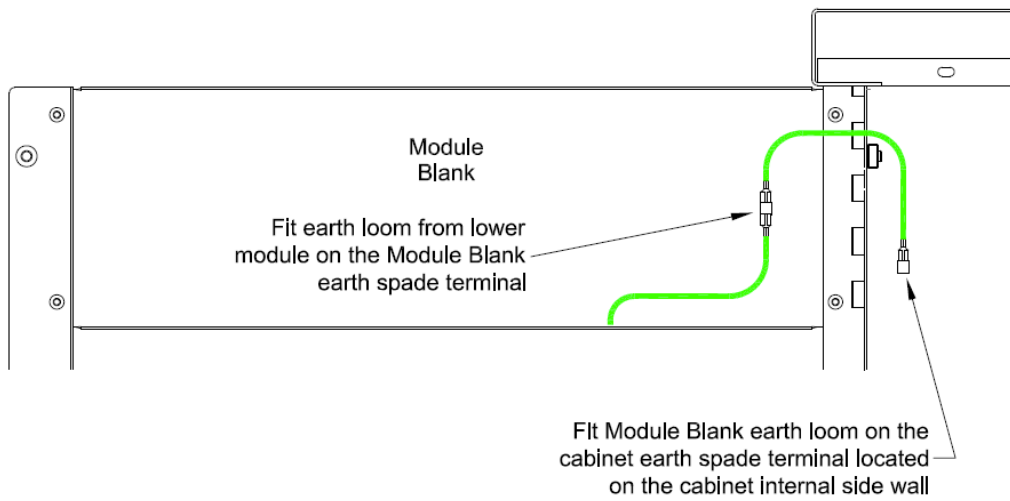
QE20 UI Blank Extender Earth Wiring – Top Position
